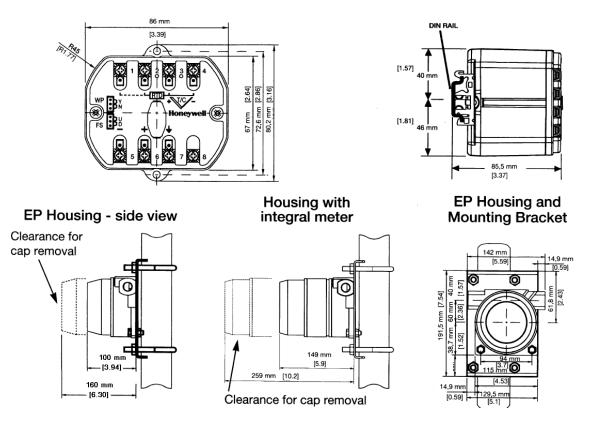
STT350 Transmitter and Optional Flameproof Housing Dimensions -reference only - mm (inches)
